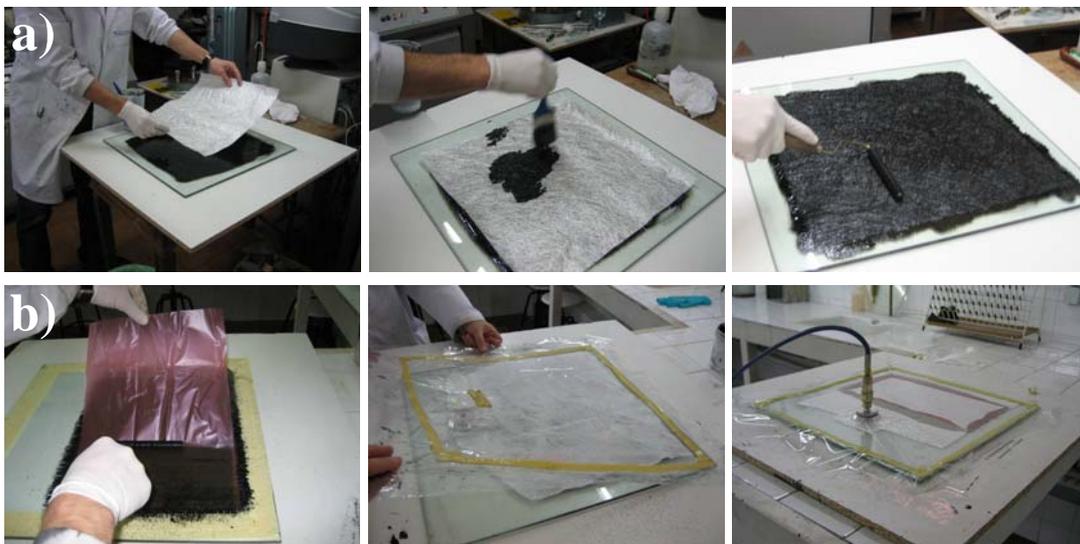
a) Hand lay-up method steps and b) vacuum bag method extra steps.
